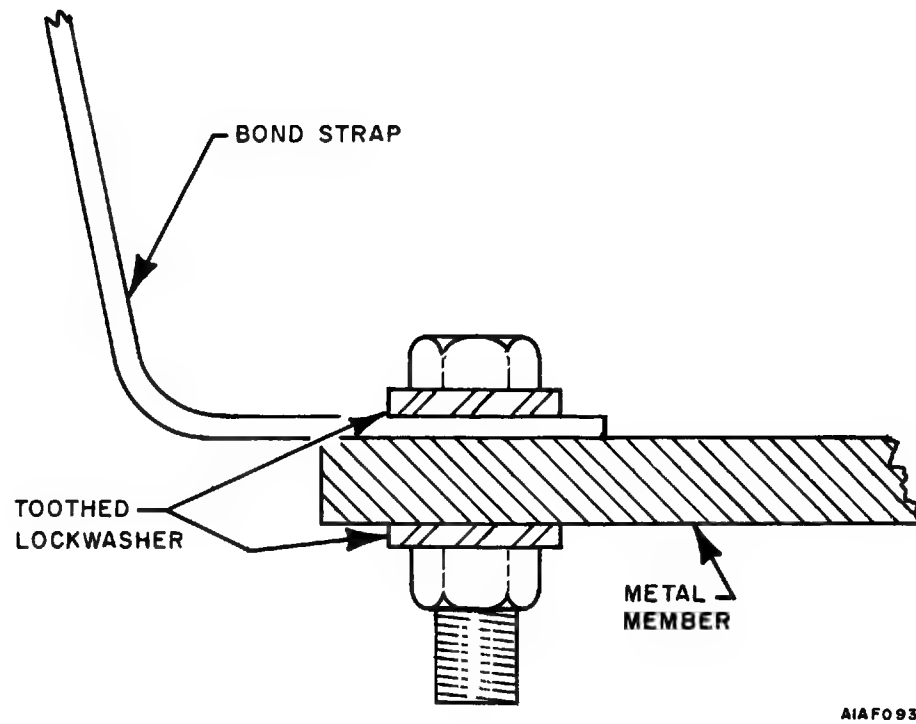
14. Recommended Bond Strap Bolting Installation
